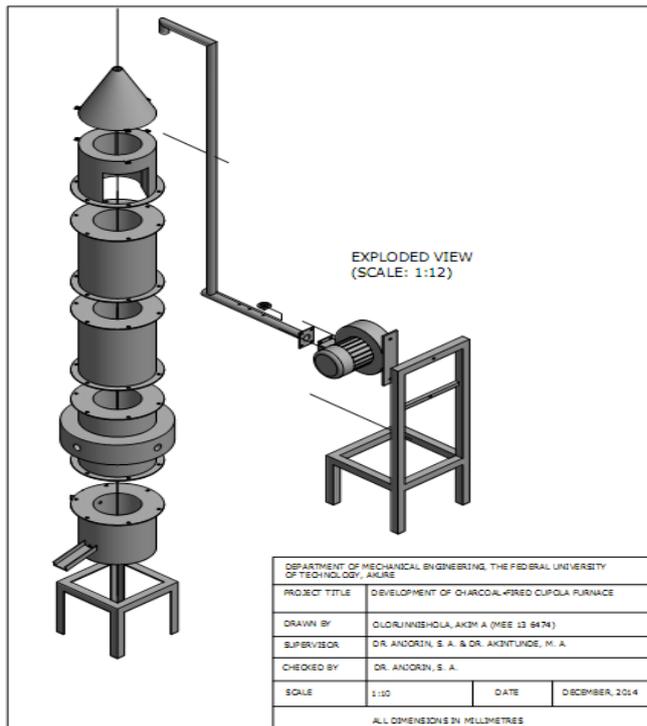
An exploded view of the fabricated erythrophleum suaveolens charcoal-fired cupola furnace.
